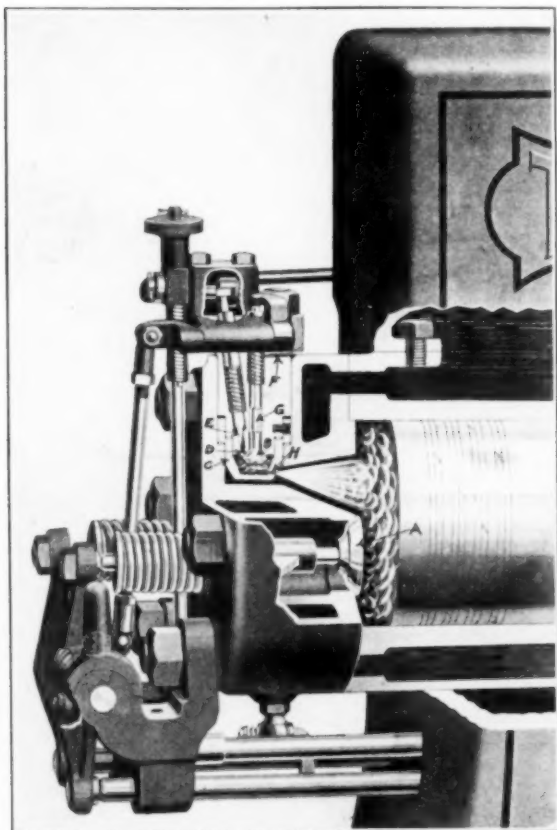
CUTAWAY SECTION OF 8-HP. HVID-TYPE FARM ENGINE
